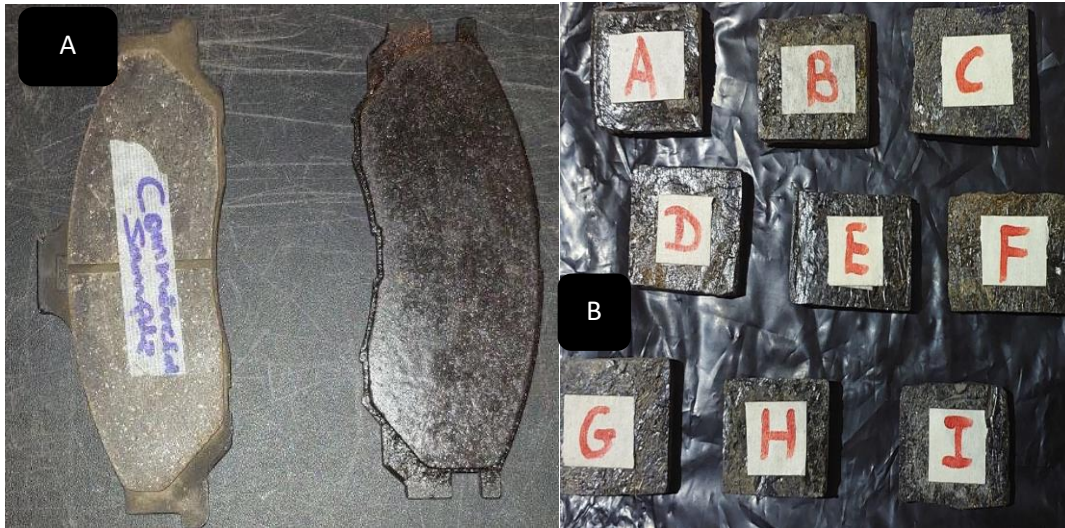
13 (A) Hardness test for commercial brake pad and (B) produced brake pad sample
